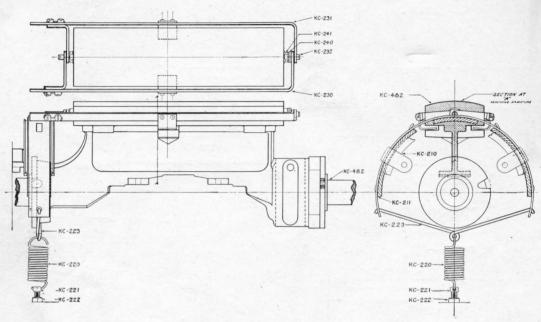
Standard Two Position Magnetic Flagman, Lower Quadrant, with Bell.
